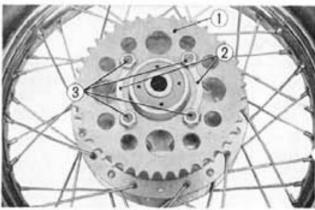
1 Final driven sprocket (2) Tongued washers
